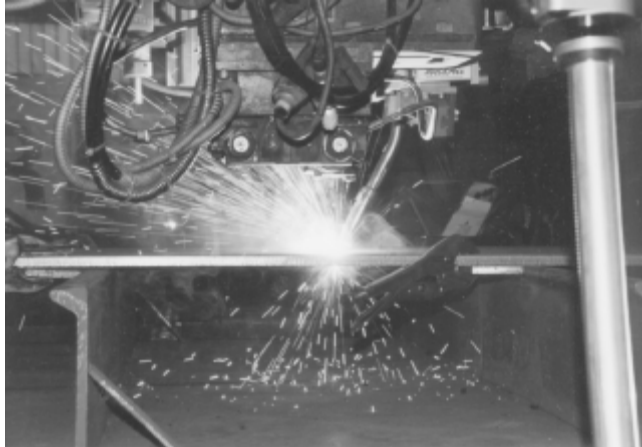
Welding of panel structures using the HWT laser beam / GMAW /20/
